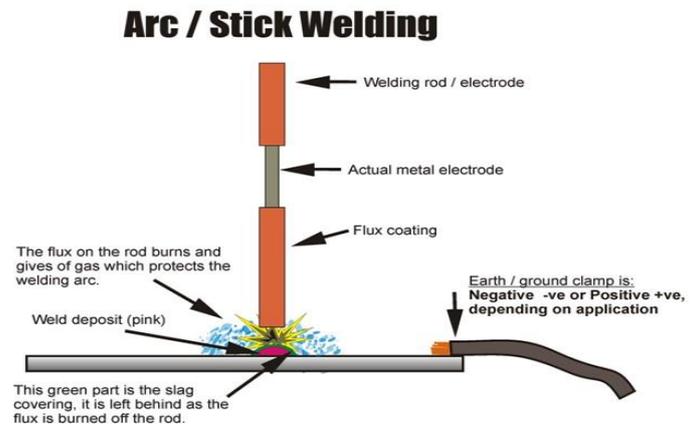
Manual Metal Arc Welding (MMAW) [9]
